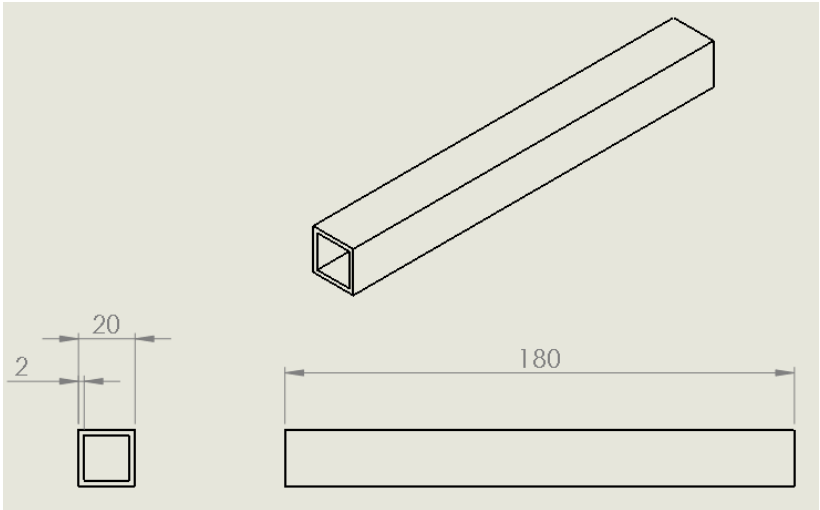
Dimensions of the hollow square beam cross-section (mm)
